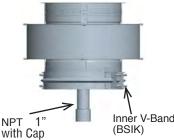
Step 6 of Removal for Inspection for the ADL
